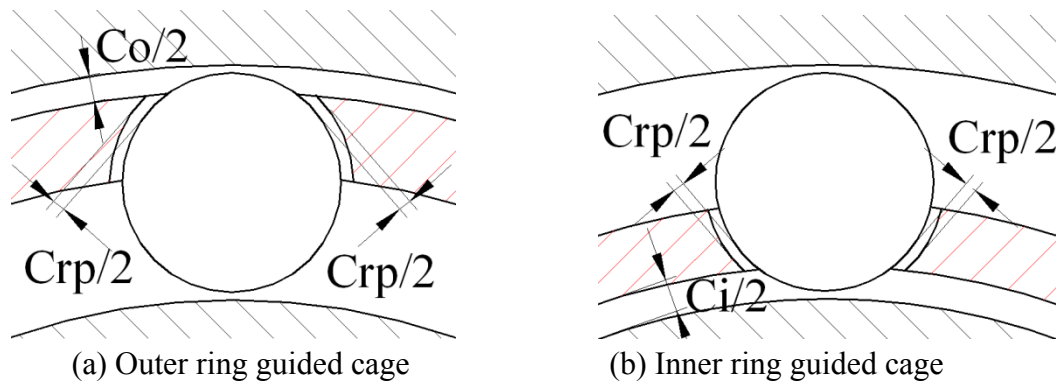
Inner ring or outer ring guiding clearances and their pocket clearances
